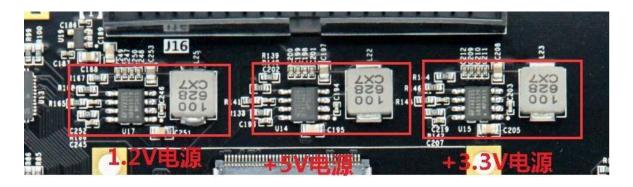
Power Supply on the Carrier Board (1.2V/5V/3.3V)
